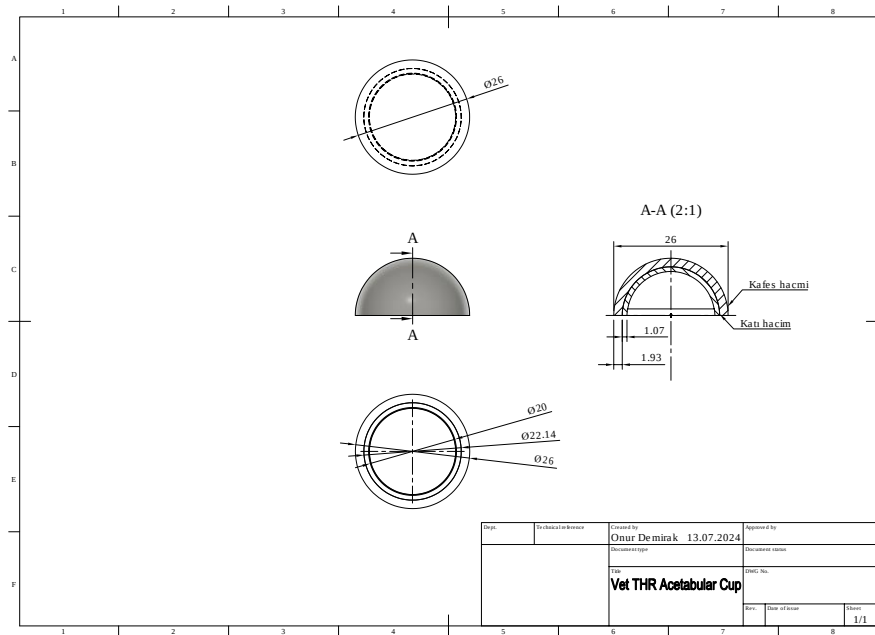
Acetabular cup technical drawing has been conducted in CAD software
